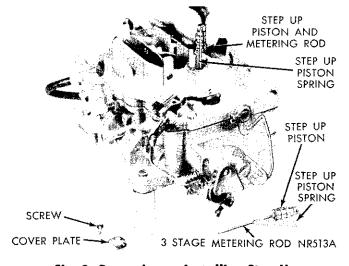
Removing or Installing Step-Up Pistons and Rods
